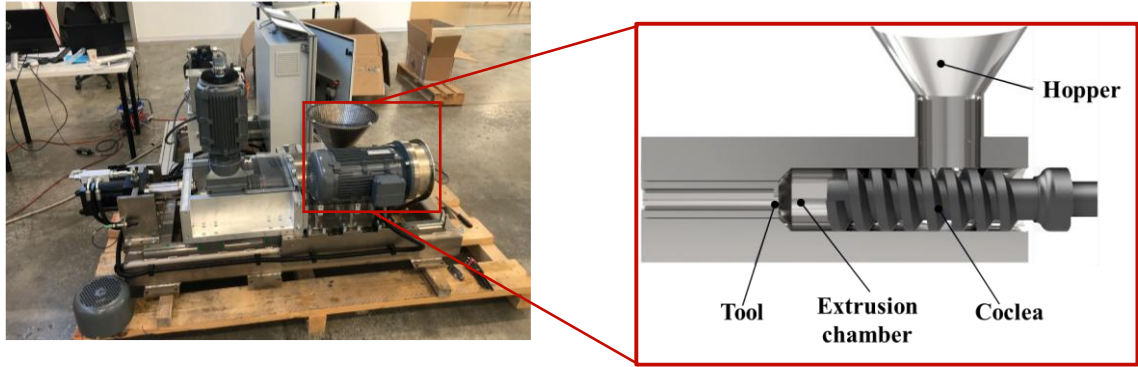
Continuum friction stir extrusion machine and 3D CAD of the machine [72] .
